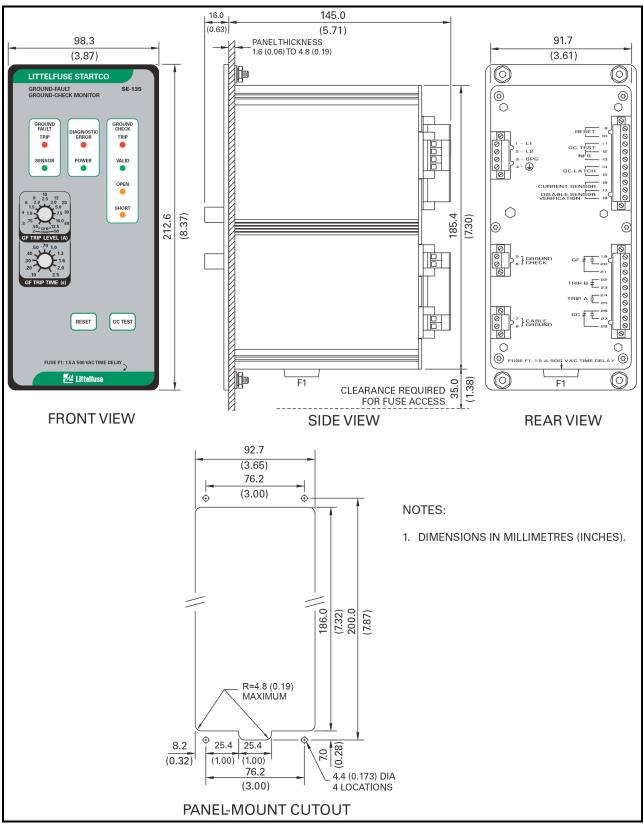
SE-135 Outline and Panel-Mounting Details.
